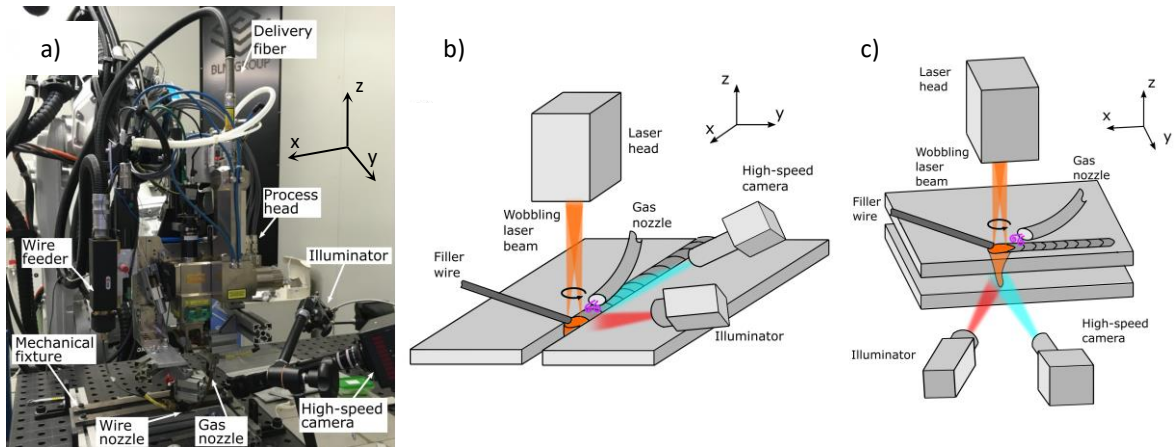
Laser welding and high-speed imaging experimental setup: a) physical set-up and schematization of high-speed camera view b) from above and c) from side.
